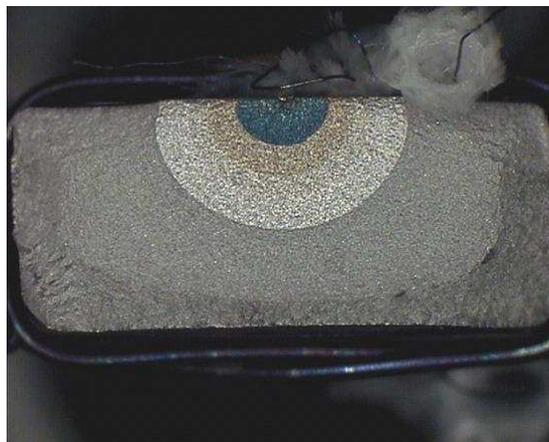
Fracture surface of the calibration specimen with visible beach marks
